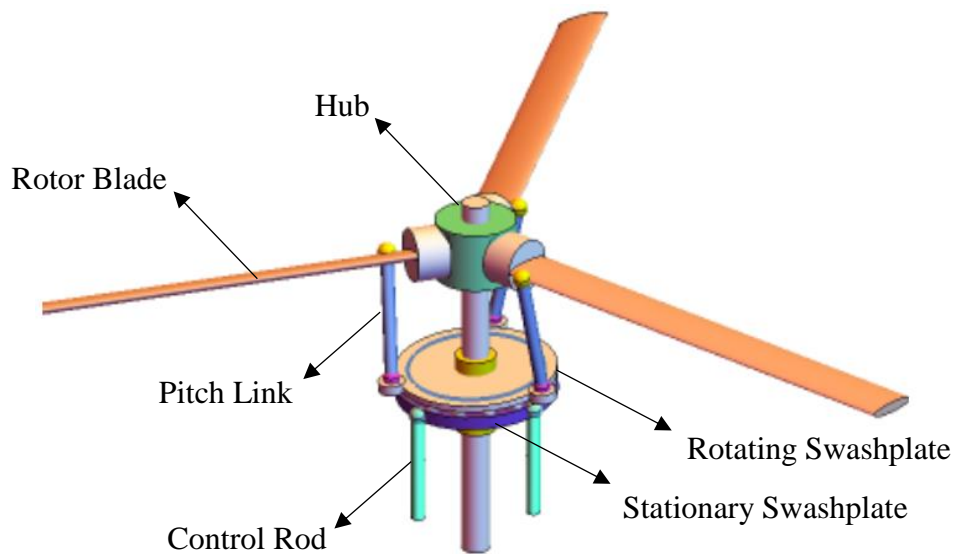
Fundamental Components of Helicopter Rotor Assembly [2]
